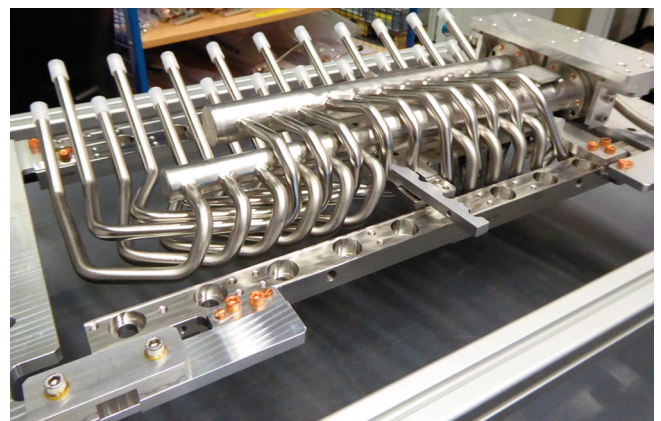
Inlet and outlet manifolds welded to pipes of TM3v.
